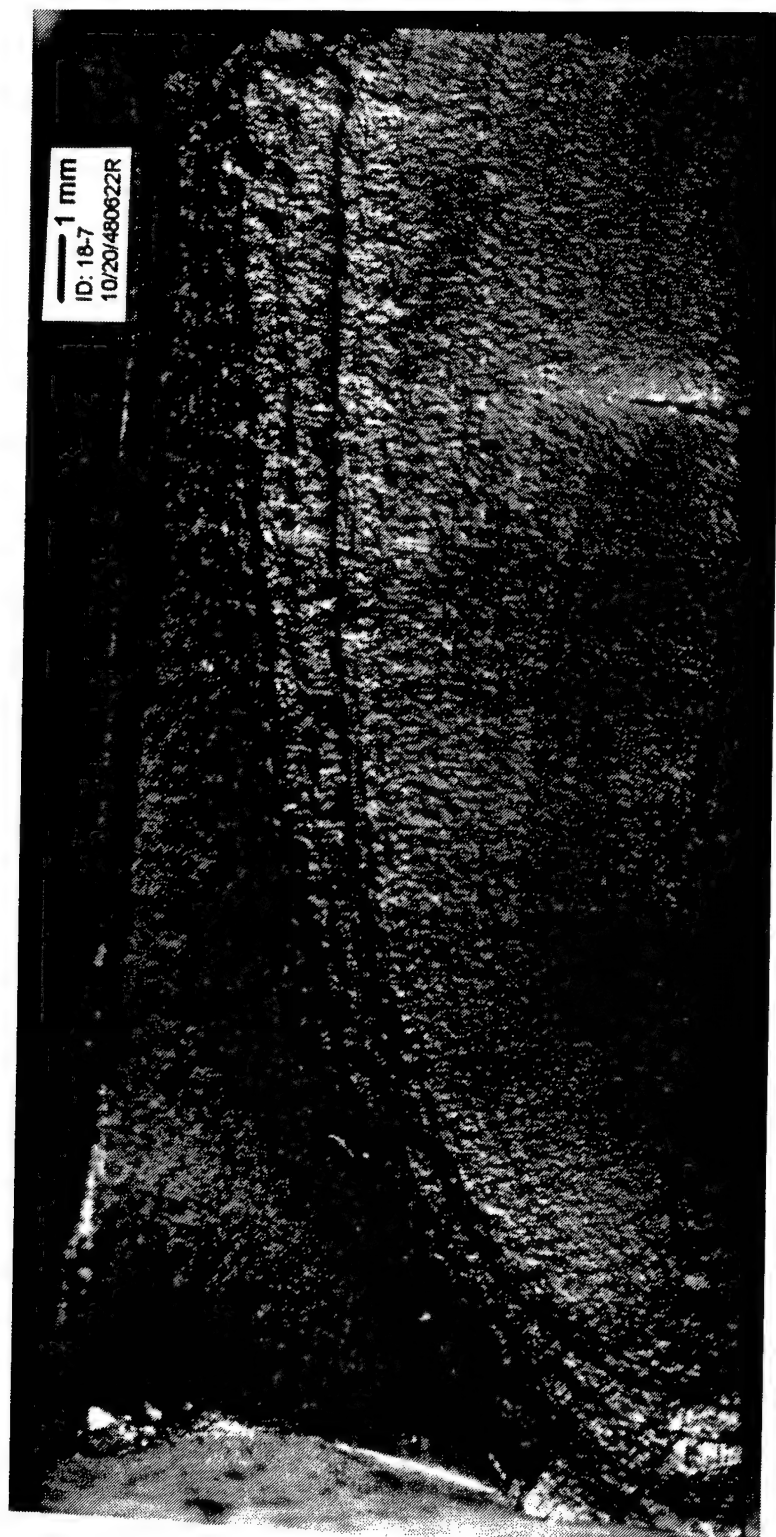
Fatigue fracture surface of the HSLA-80 but weld sample subjected to random loading:
